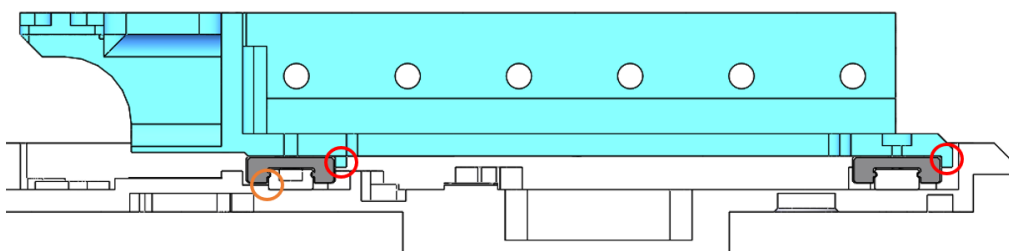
Baseplate-A1 linear guide assembly – side section view
